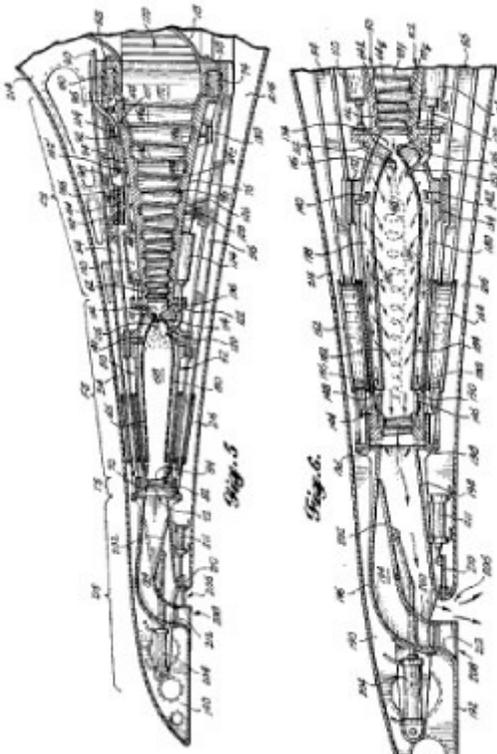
is a further radial sectional view on a larger scale of certain parts of the engine and thrust control components shown in FIG. 5;
